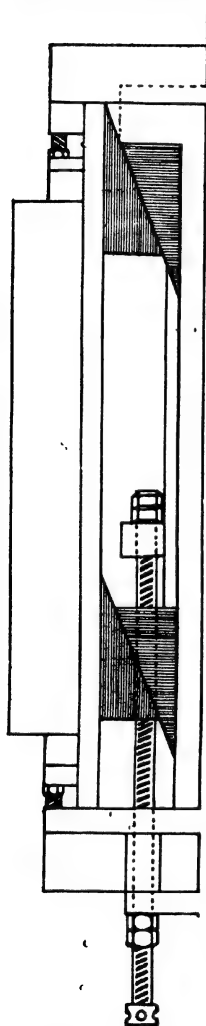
The Stone Carriage, with Arrangement for Raising and Lowering the Stone or Iron Bed-plate.
